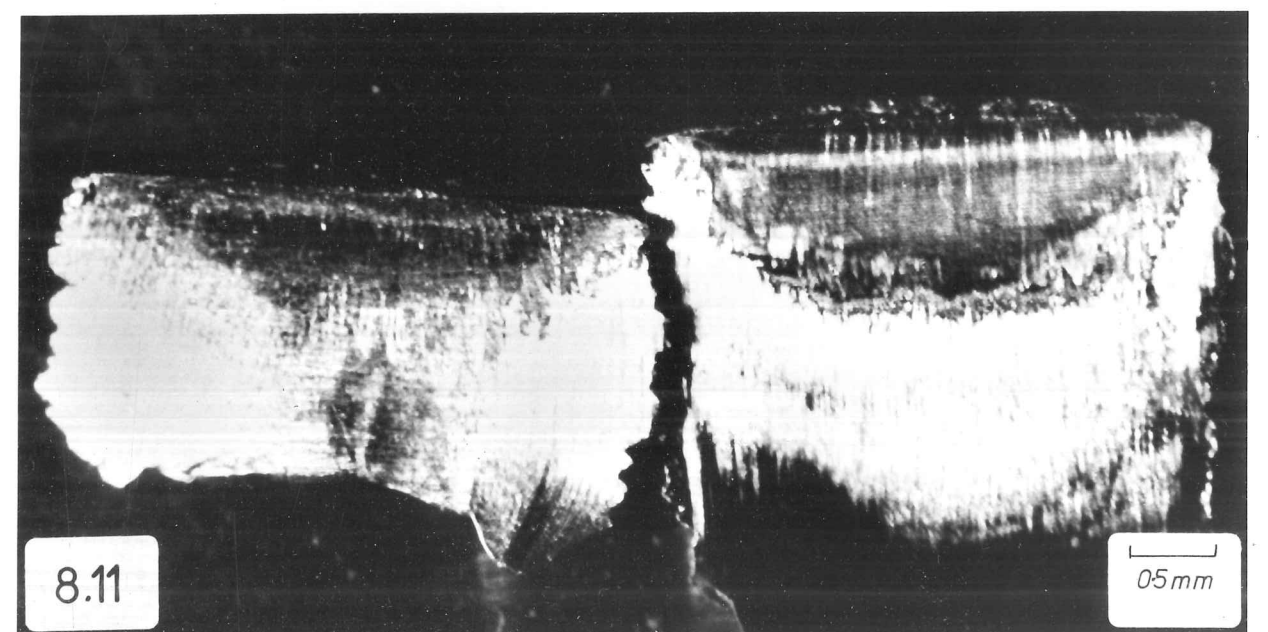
Pure aluminium chips produced when machining a workpiece coated with copper as depicted in Figure 8.10.
